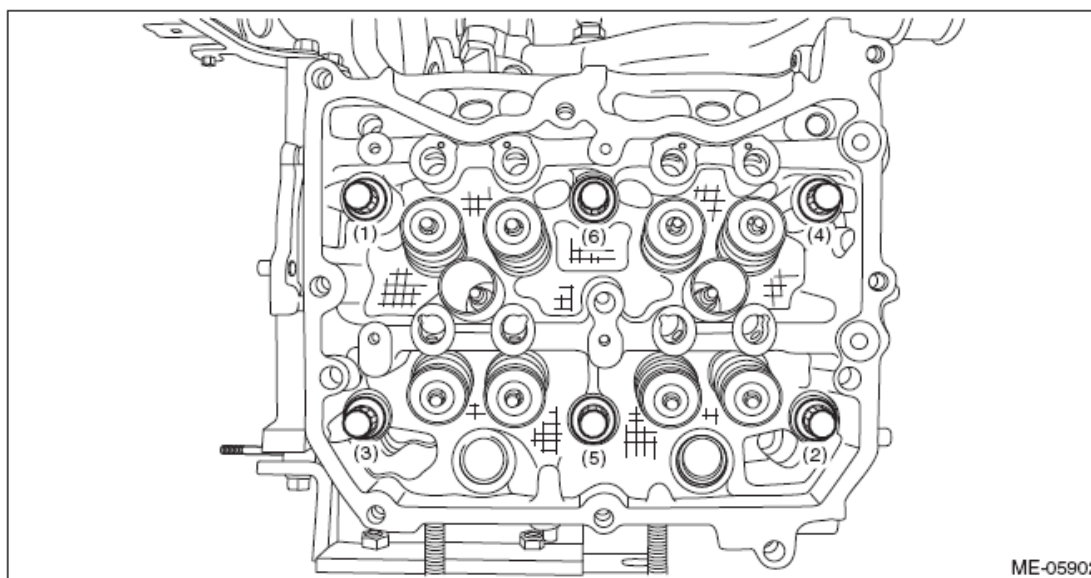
Identifying Cylinder Head Bolts Loosening Sequence
